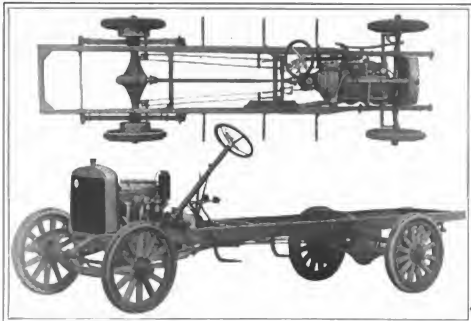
New Kisselcar 1-tonner in plan and perspective, showing unit power plant, worm drive and drive through springs
